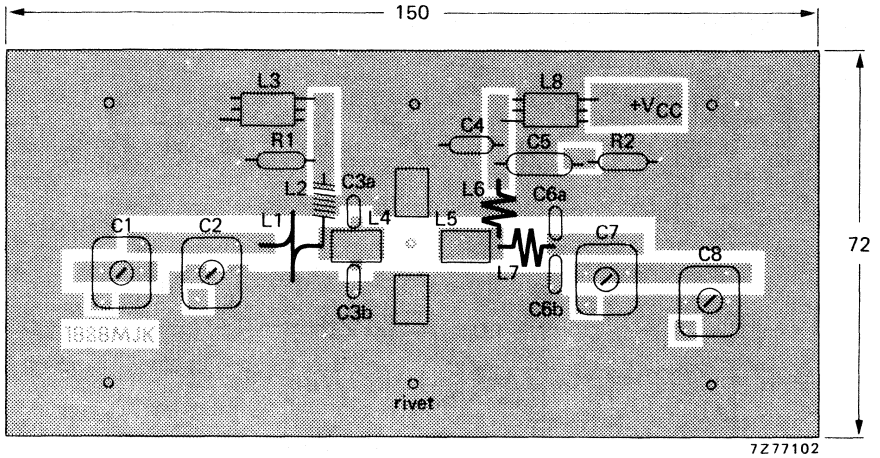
Component layout and printed-circuit board for 175 MHz test circuit.
